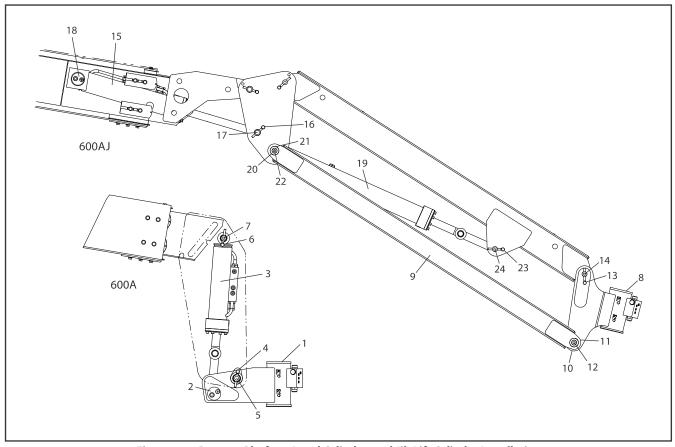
Rotator, Platform Level Cylinder, and Jib Lift Cylinder Installation
